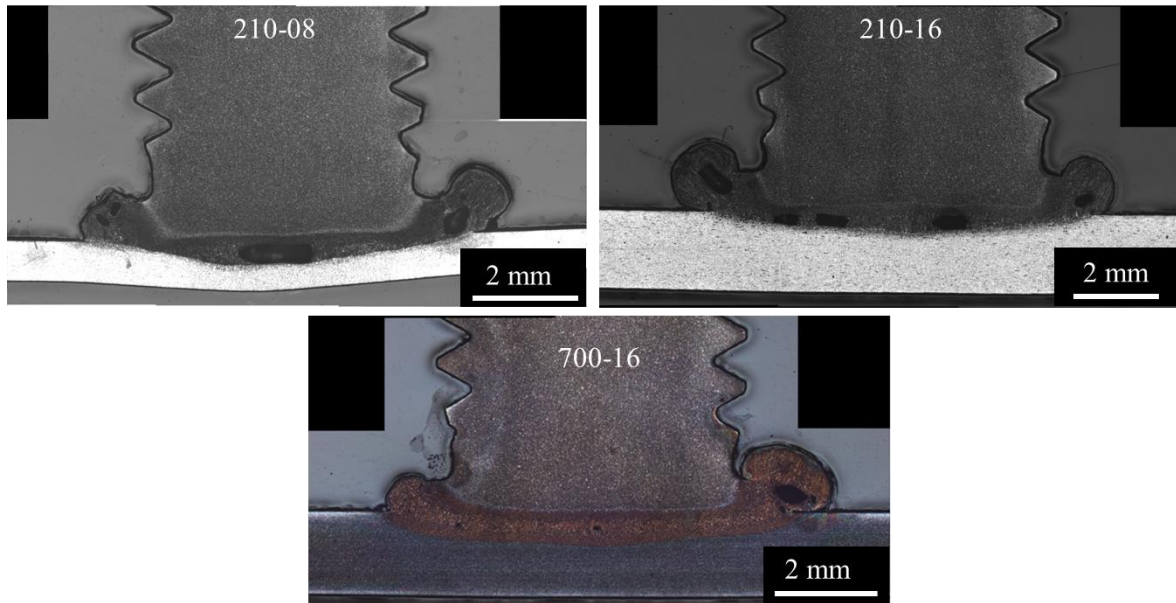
Local geometry of the seam weld of the bolt specimens
